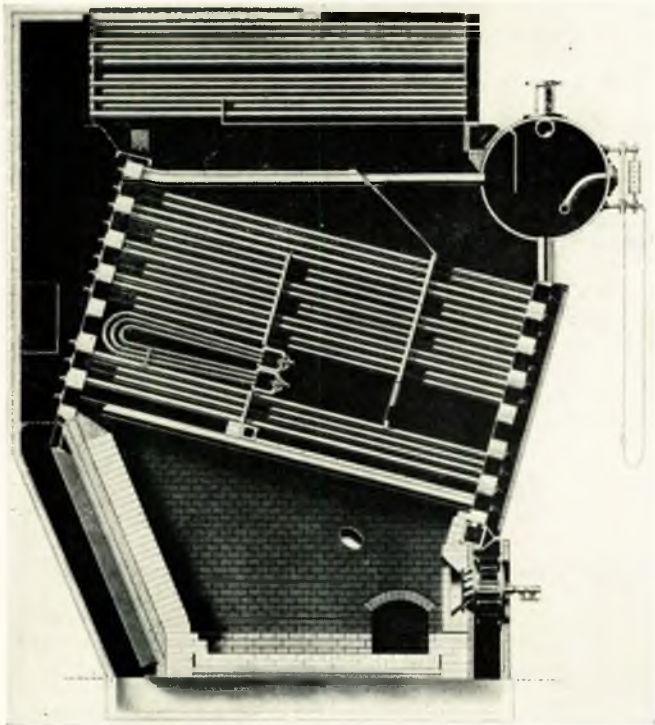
3-pass, sectional header, marine boiler, 1930 era
